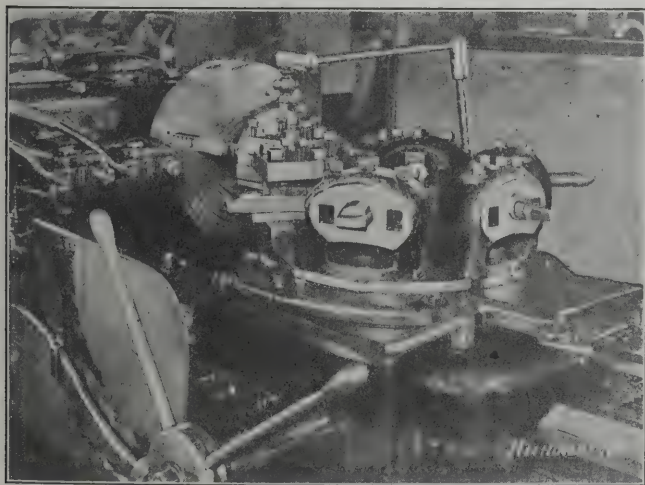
Second Operation on the Flat Turret Lathe, using Special Jaws
